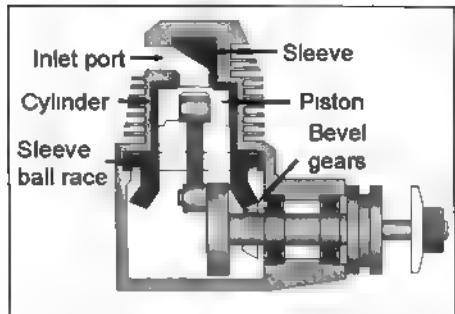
The piston/sleeve/cylinder layout of a sleeve-valve engine. The exhaust and inlet ports are offset by 90°.
